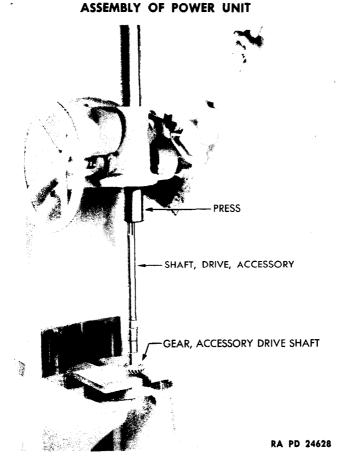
Pressing Accessory Drive Shaft Gear On Shaft
